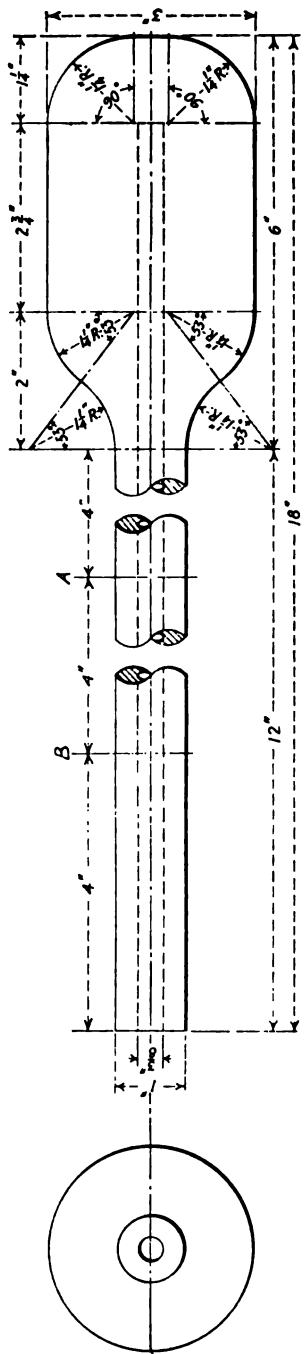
TEST PIECE USED IN QUENCHING TESTS
